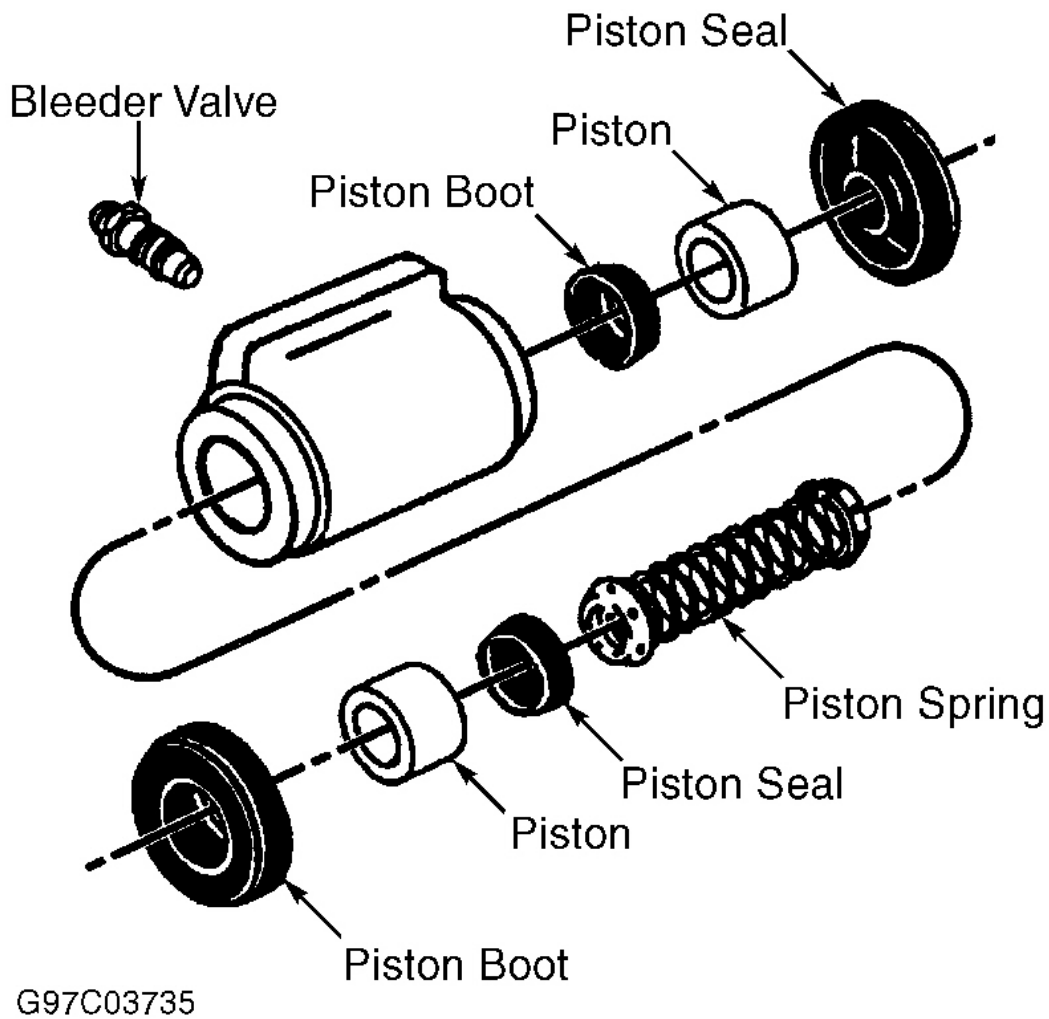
Exploded View Of Rear Wheel Cylinder (Typical)
